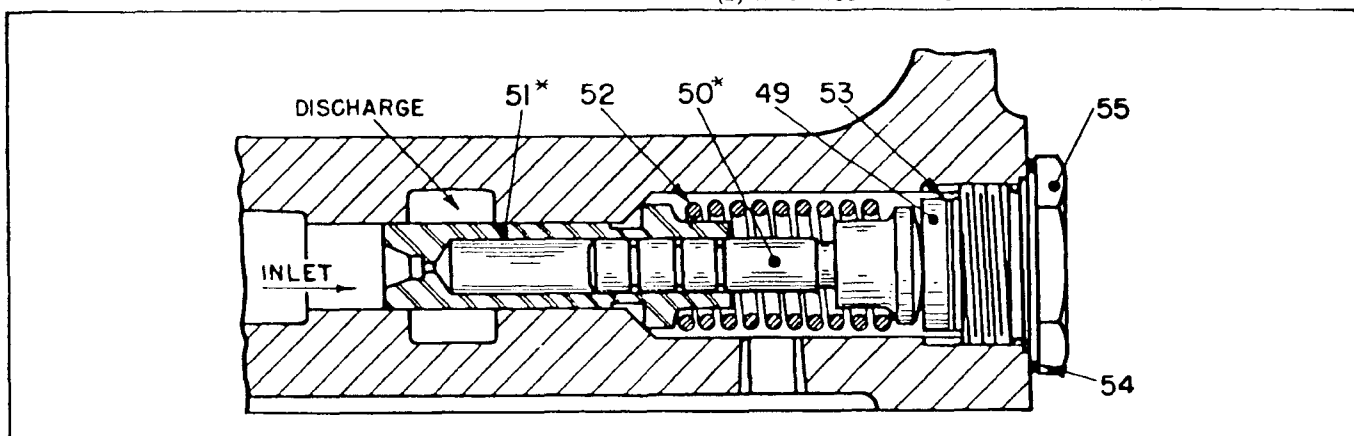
Typical Gear Pump Relief Valve (2V-8374-L)
